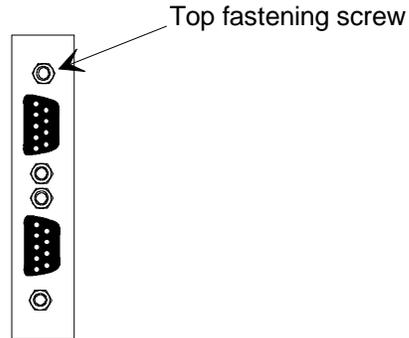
Top Fastening Screw on the Dual Thermocouple Board
